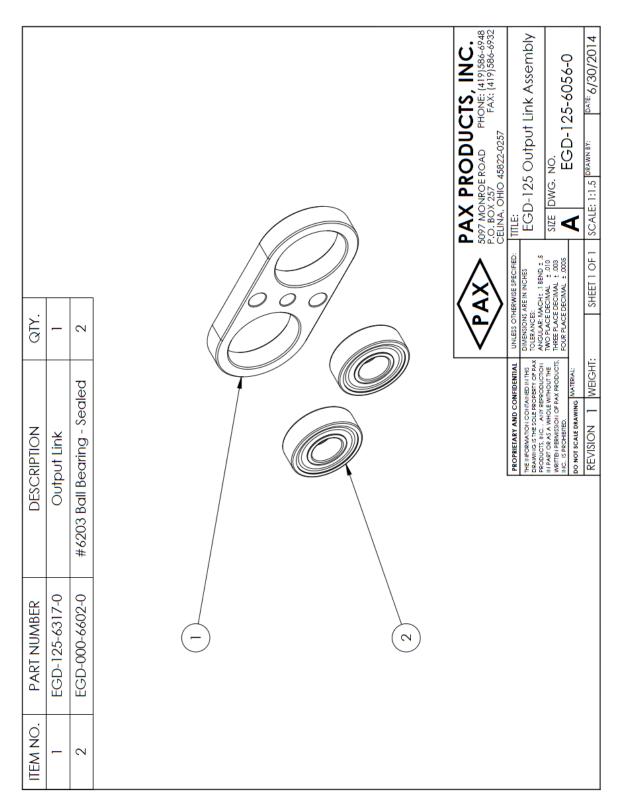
EGD-125 OUTPUT LINK ASSEMBLY
